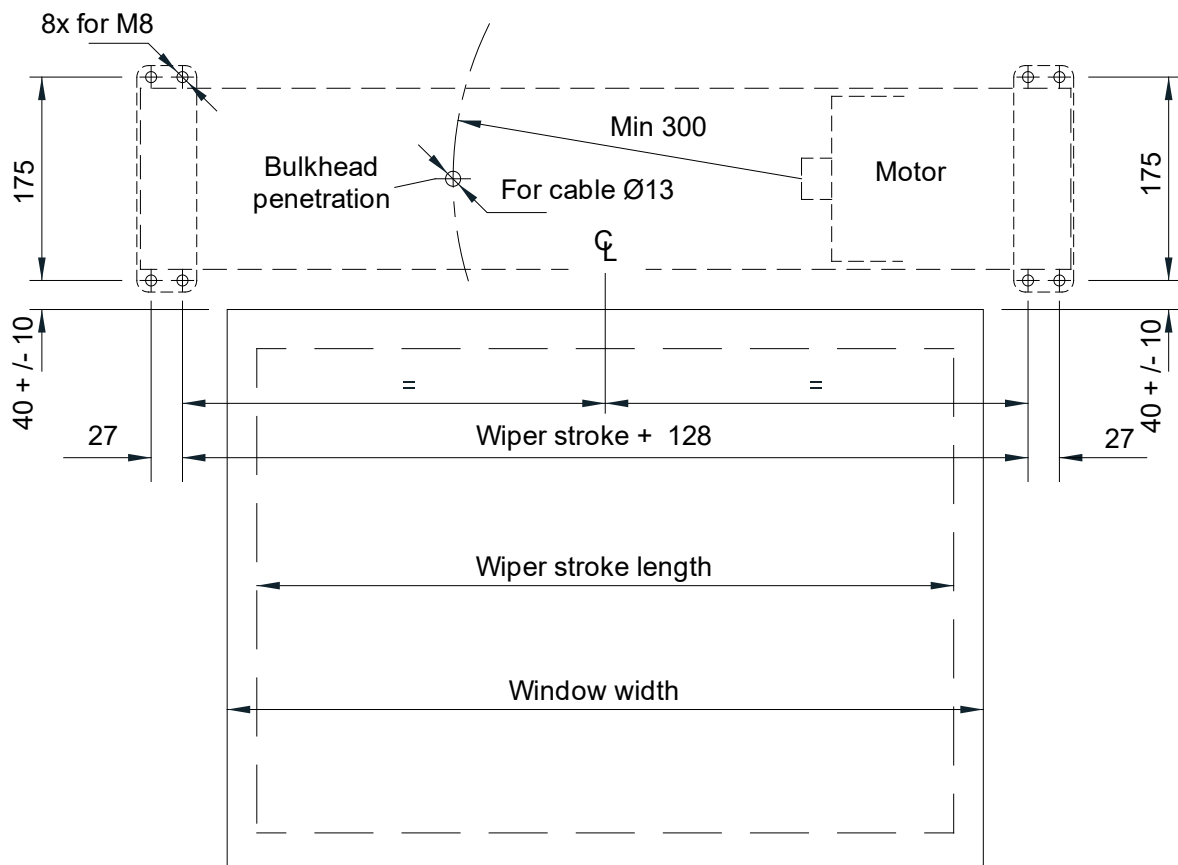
Wiper Unit Footprint (all measurements in mm)
